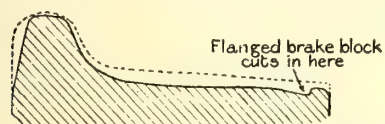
WHEEL CUT BY BRAKE-SHOE
